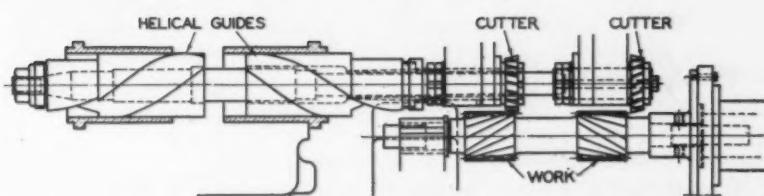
Method of cutting simultaneously two helical gears spaced far apart and integral with a shaft.
